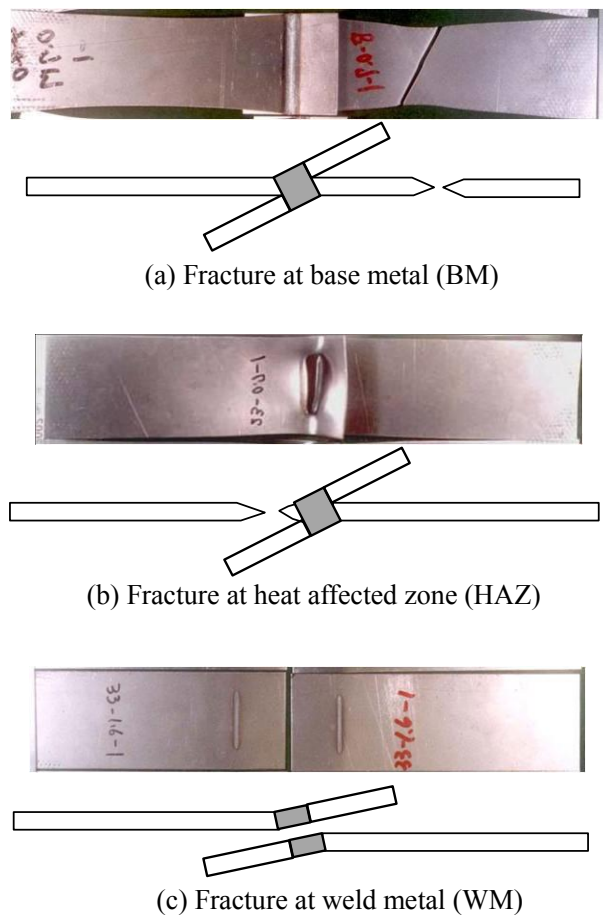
Fracture mode of laser lap joint in the tensile test.
